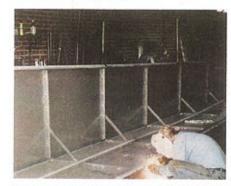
Welding sides one and two together. Carbon steel bars were used to reinforce the corners.
